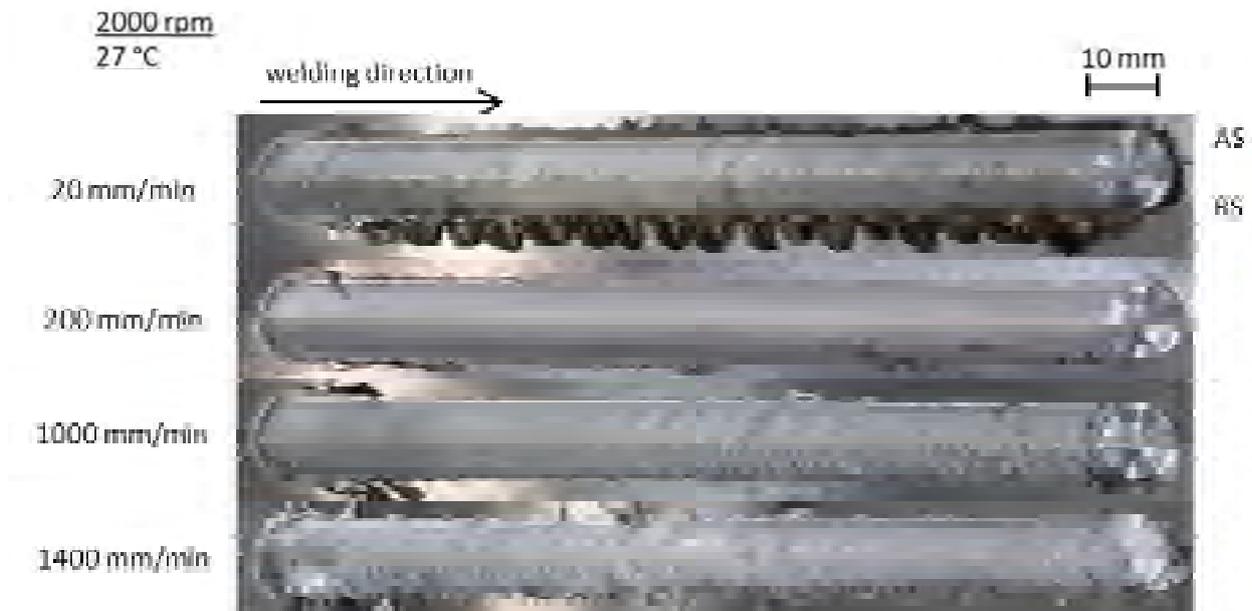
surface appearance of FSW of rolled AZ31 for different welding speeds at constant rotational speed and initial temperature of 27 °C.
